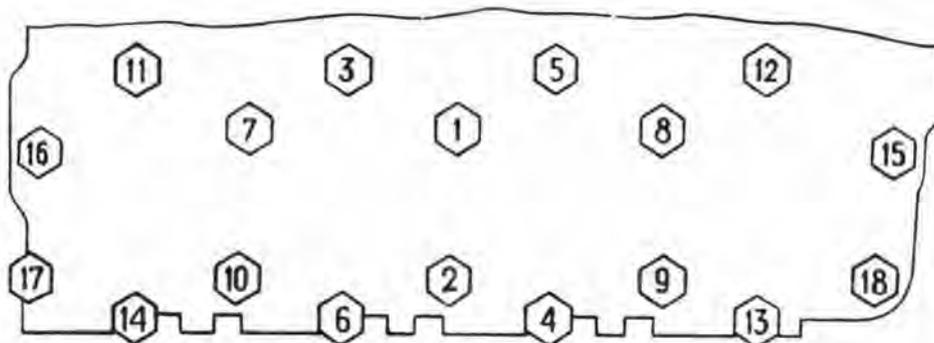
CYLINDER HEAD NUTS TIGHTENING ORDER
